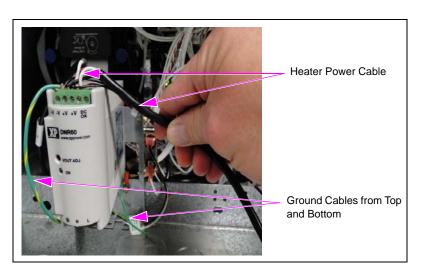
Connecting Switching Power Supply to Dispenser Chassis
